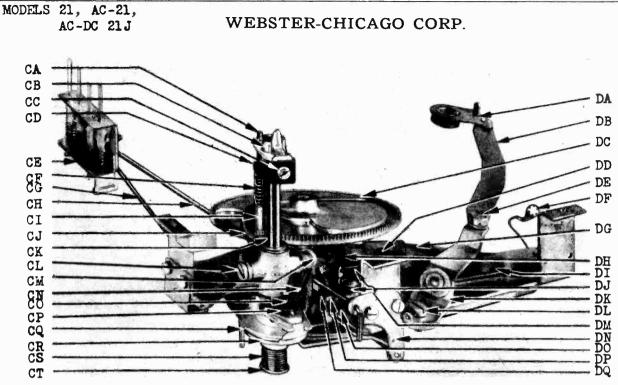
PHOTO C-D. View of Sub-Plate Assembly, Together with Certain Other Assemblies.
